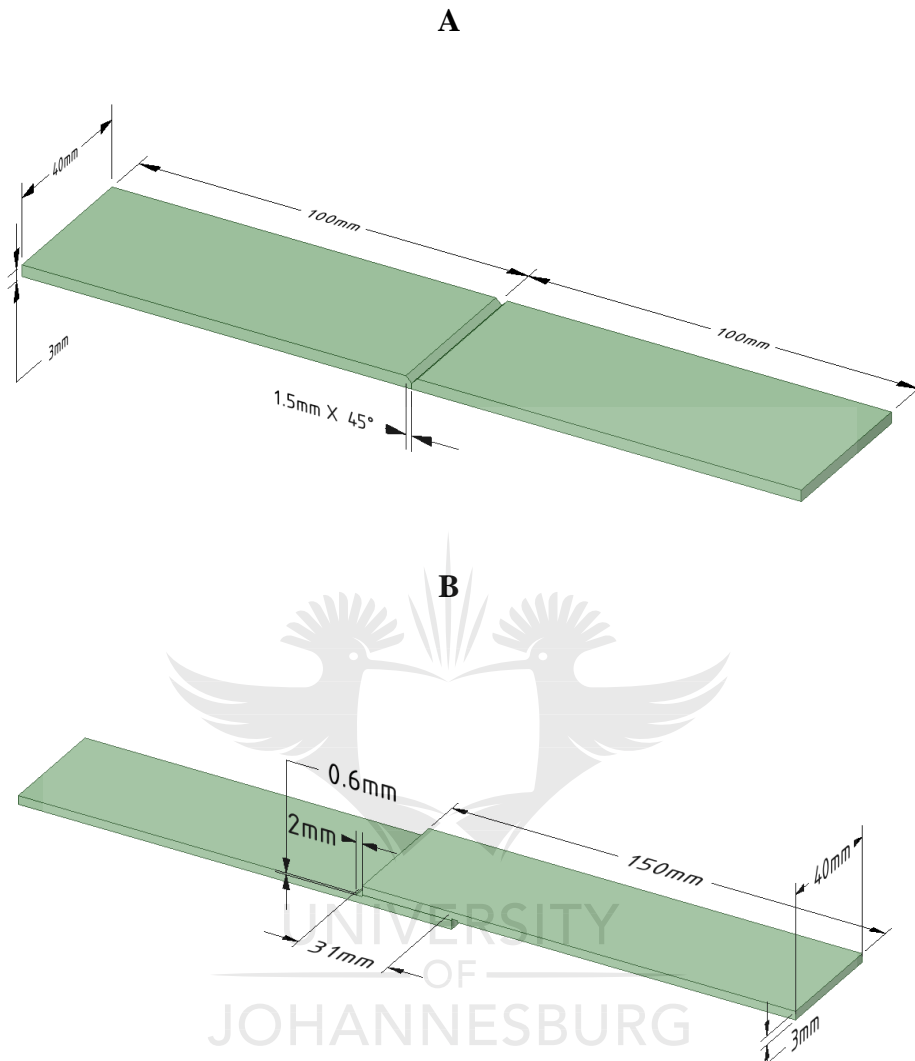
Dimensions of (a) butt and (b) lap joint steel sheets
